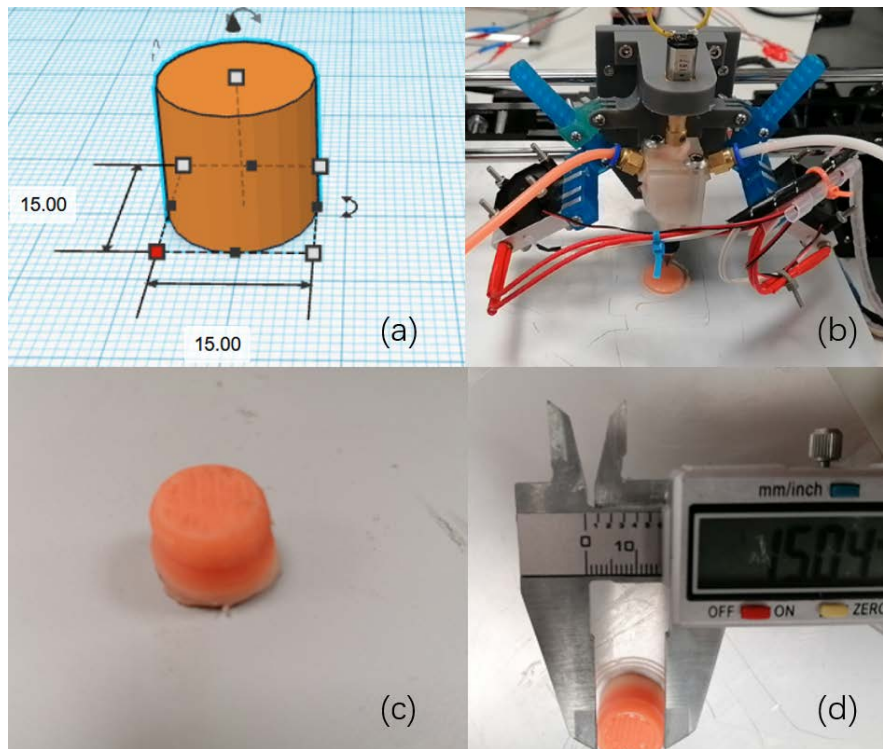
(a) 3D CAD model of cylinder sample with the diameter of 15 mm; (b) cylinder sample printing in progress; (c) printed cylinder; (d) diameter measurement of printed cylinder: 15.04 mm.
